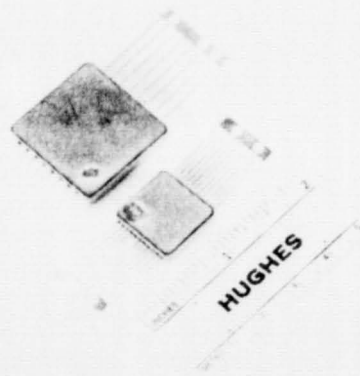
Typical packages which had holes punched in the covers and then had these holes resealed.
